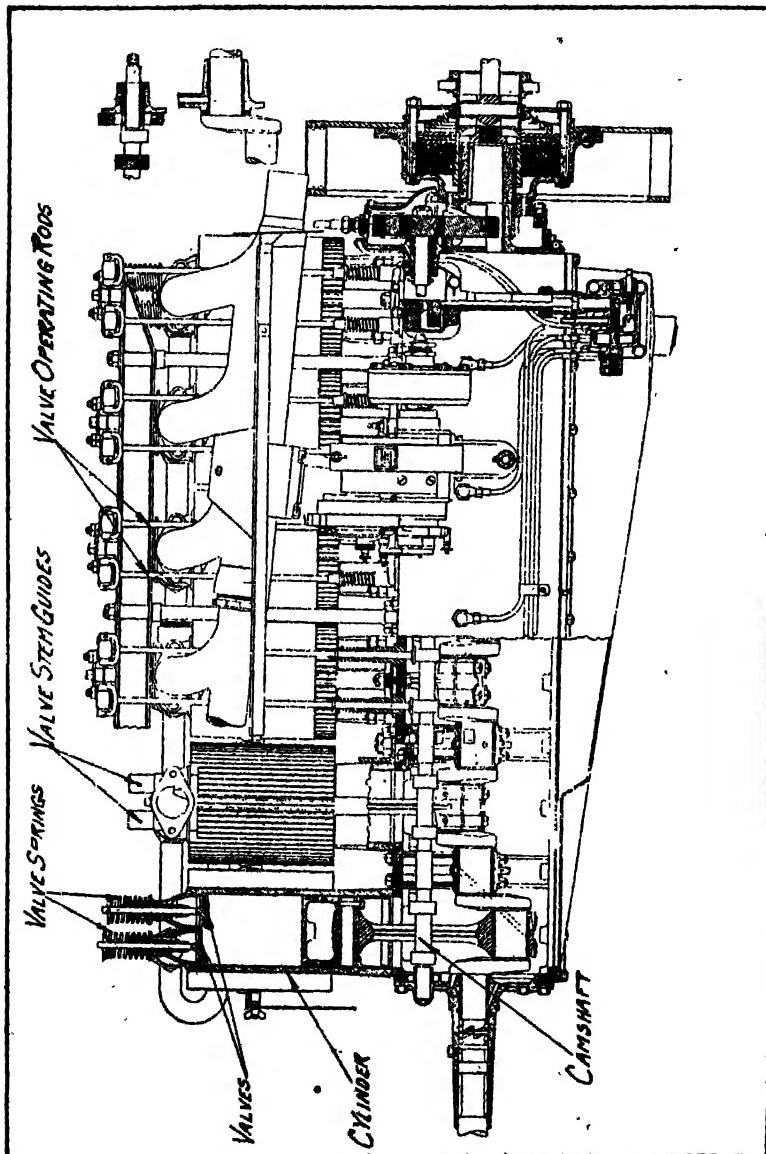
Part Sectional View of the Franklin Six Cylinder Air Cooled Engine, Showing Unconventional Valve Installation.
